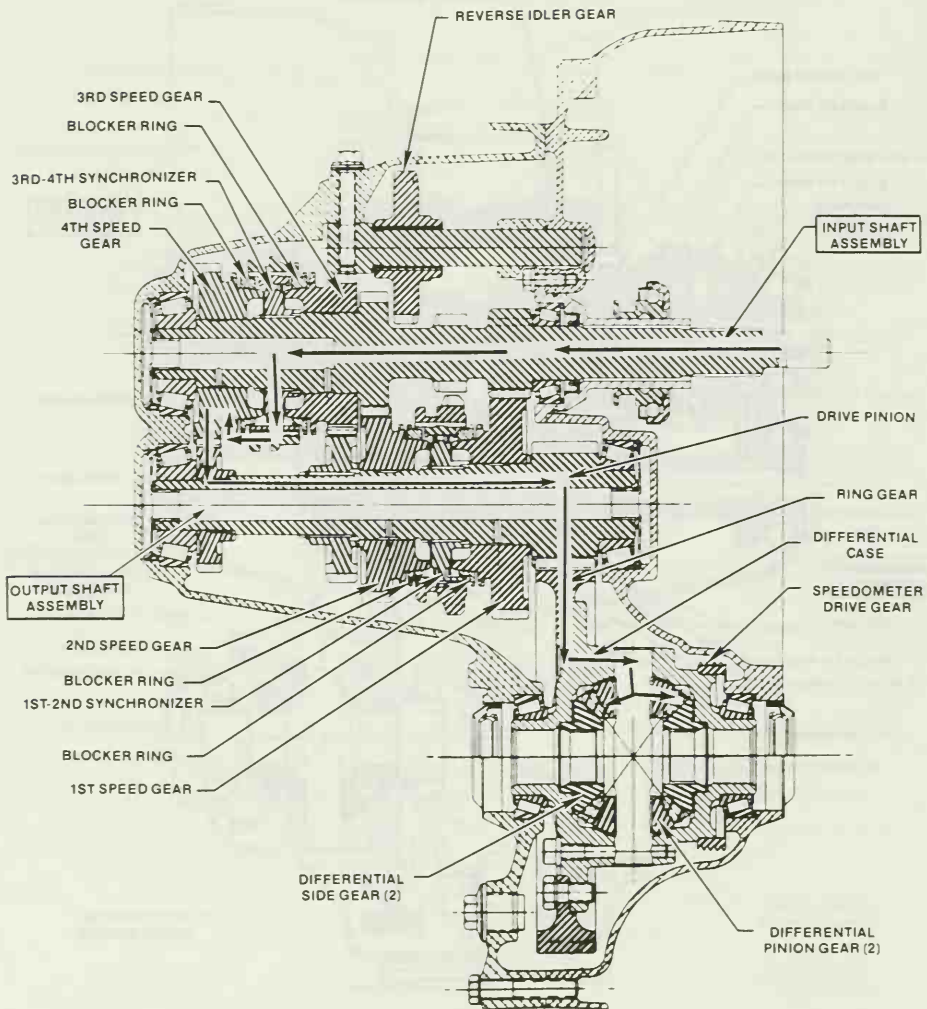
Transaxle operation in fourth gear. (Buick Motor Division of General Motors Corporation)
